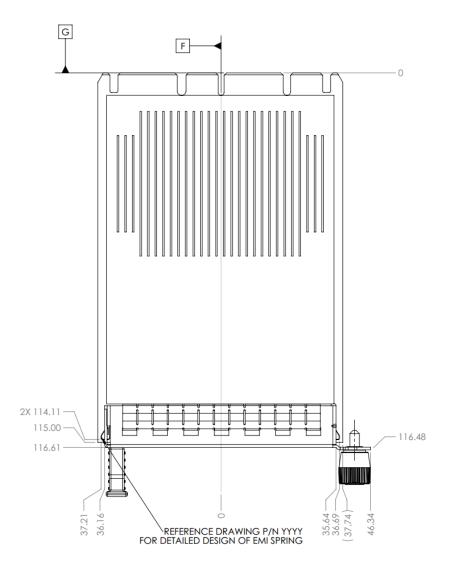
Small Form Factor OCP NIC 3.0 Card with Thumbscrew CTF Dimensions (Front View)
